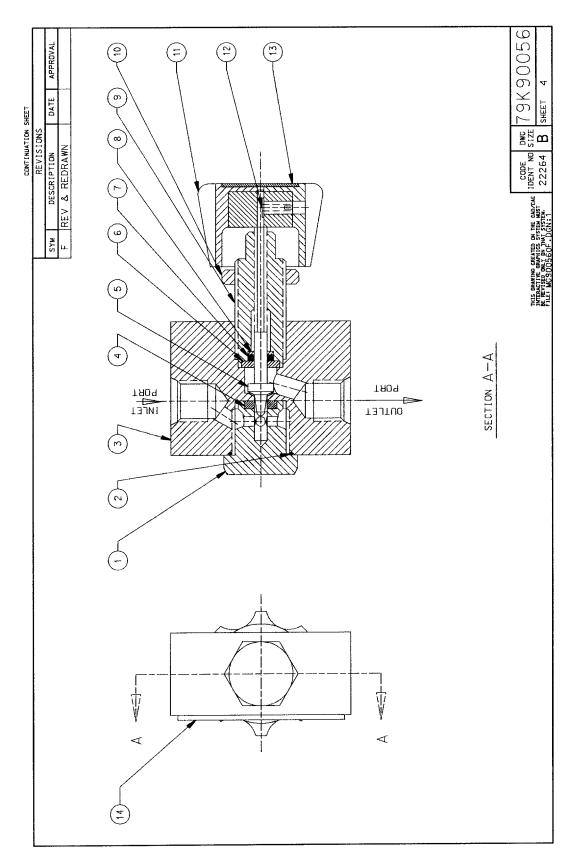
Typical Component Maintenance Drawing (Sheet 4 of 5)
